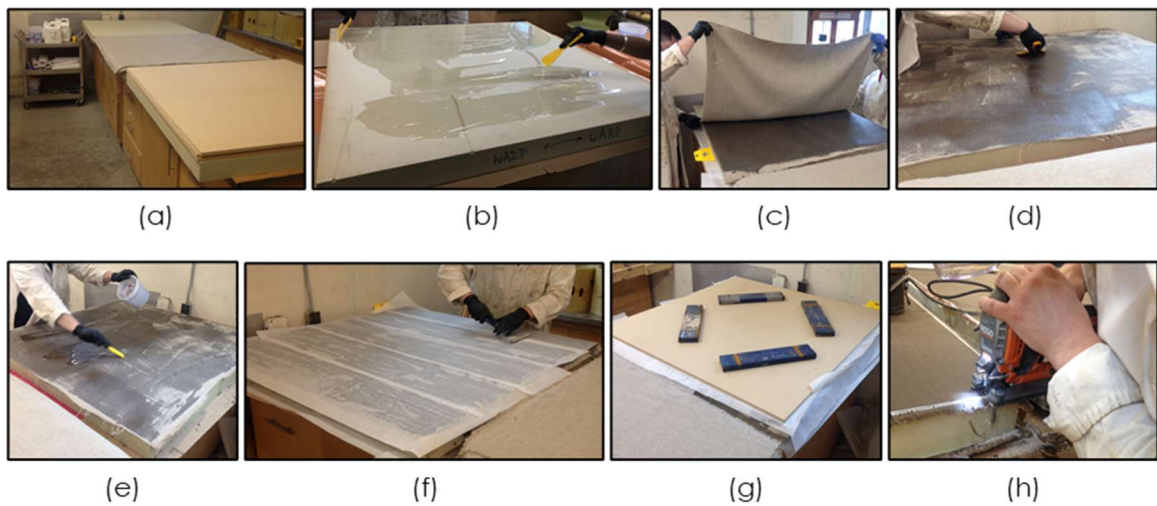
Specimen fabrication: (a) materials and workstation; (b) epoxy application to foam; (c) placement of fabric; (d) removal of air under flax layer; (e) epoxy application on fabric; (f) placement of parchment paper; (g) curing with weight board; and (h) cutting edges
